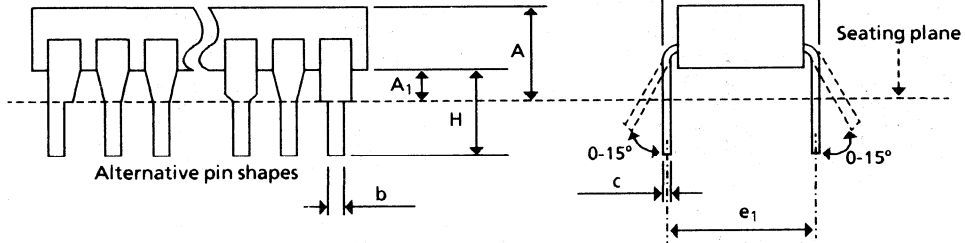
48-Lead Ceramic DIL (solder seal) - package style C
